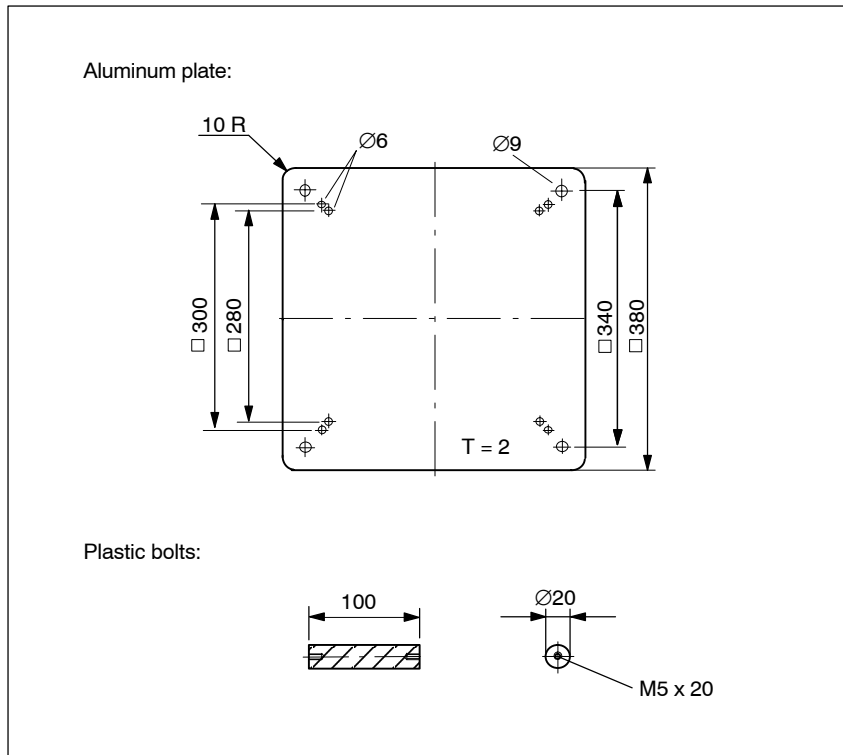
Dimensioned drawing for the spacing kit for the MOBY D ANT D5
